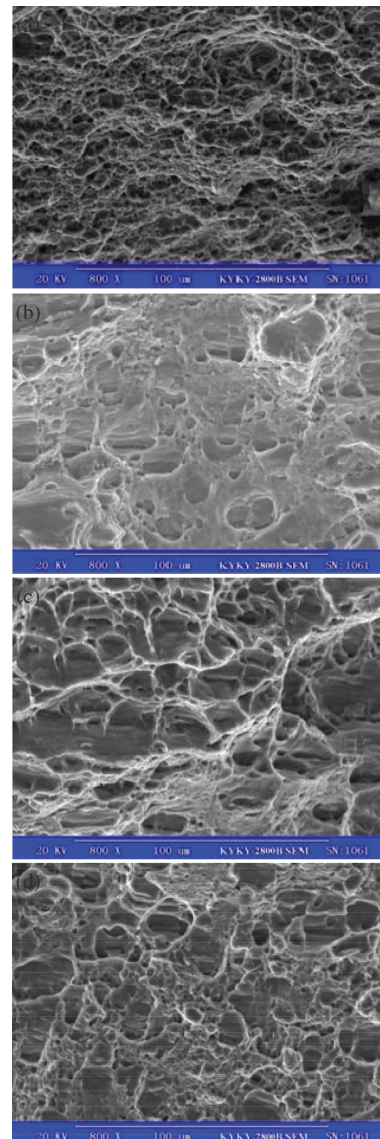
Fracture morphology of the joints welded at different welding speeds: (a) 200 mm/min, (b) 400 mm/min, (c) 600 mm/min and (d) 800 mm/min.
